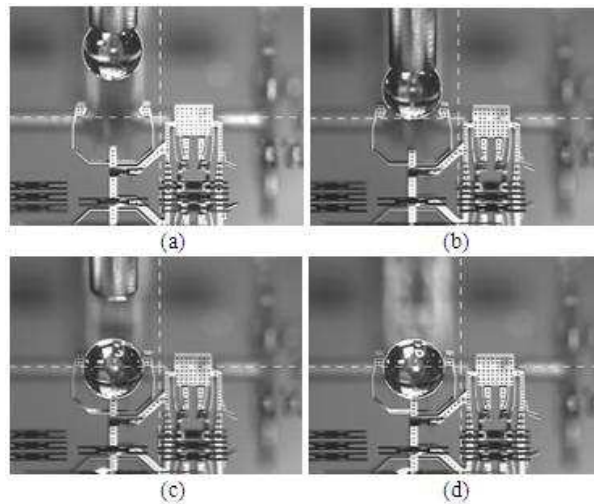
Assembly of ball lens with vacuum nozzle, (a) approach, (b) contact, (c) release (d) assembly.
